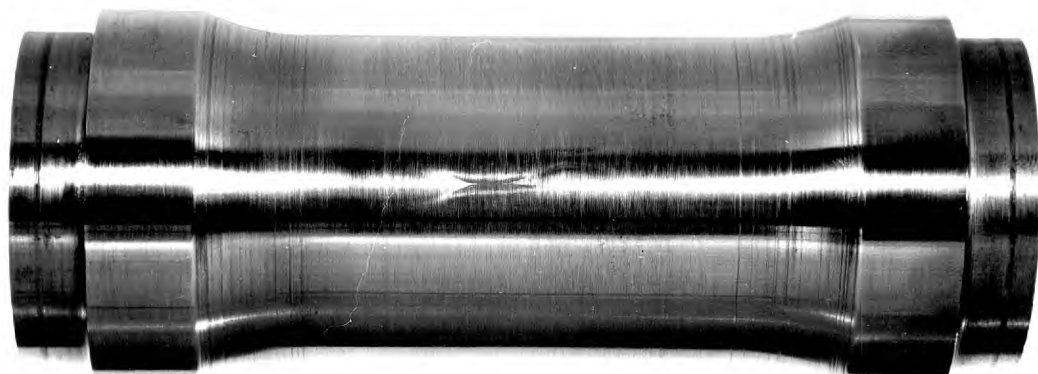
(a) External Cracks on One Side of Specimen No.16.
